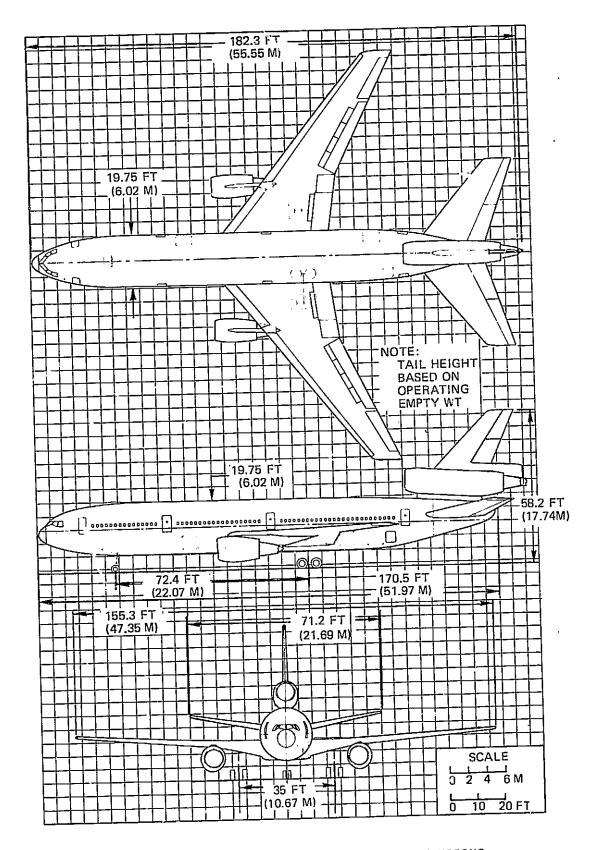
DC-10-10 GENERAL AIRPLANE DIMENSIONS
